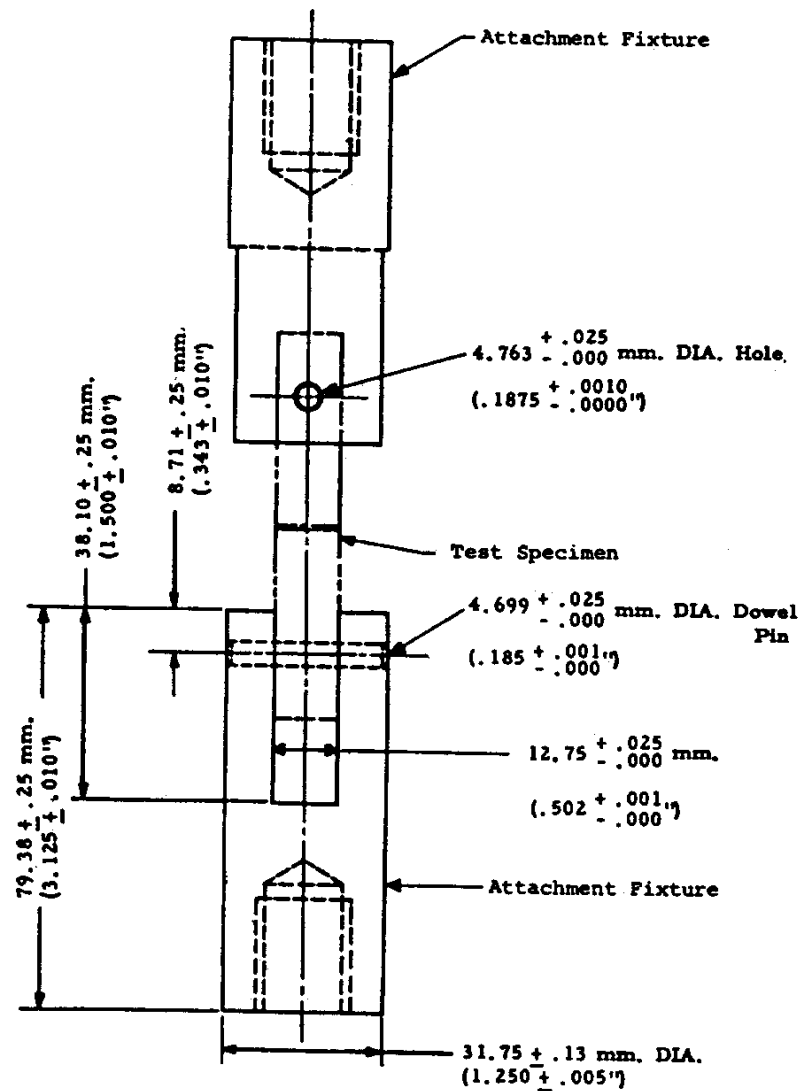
Test specimens and attachment fixtures.
